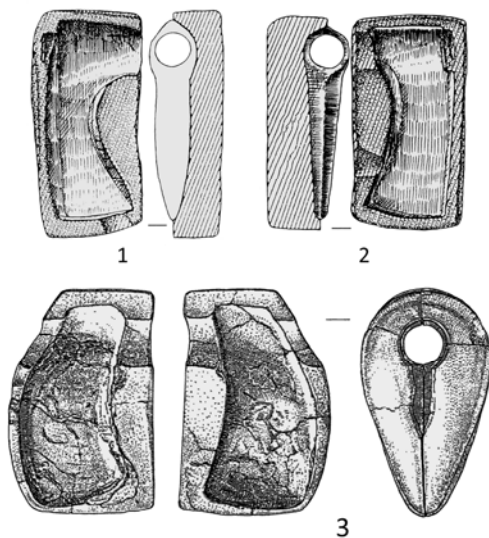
Casting molds: 1-2, Zok settlement [11]; 3, Burial in Lugans'k city [5].
